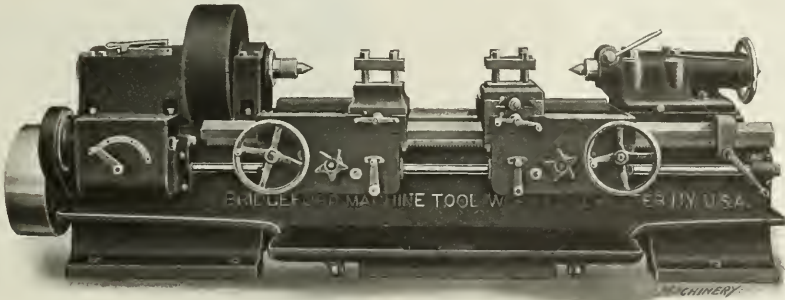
Front View of Bridgeford 27-inch Plain Turning Machine
